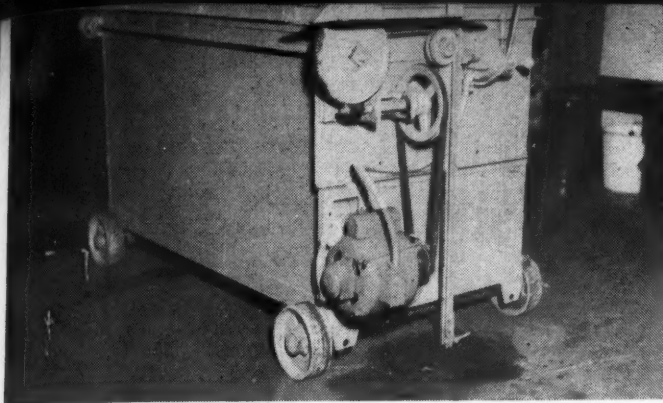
Exterior of motor-operated dipping tank showing 1/4-hp. motor, control, and rig for raising and lowering grilled elevator platform inside tank.
